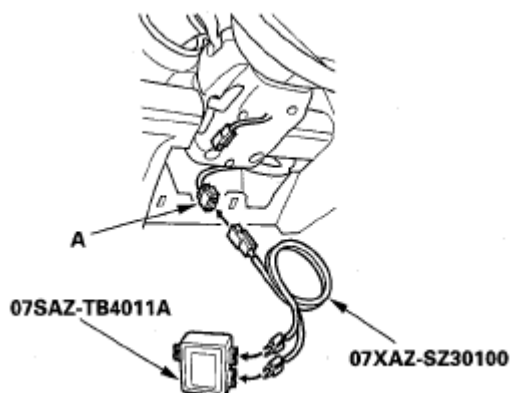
Identifying Dashboard Wire Harness B 4P Connector
